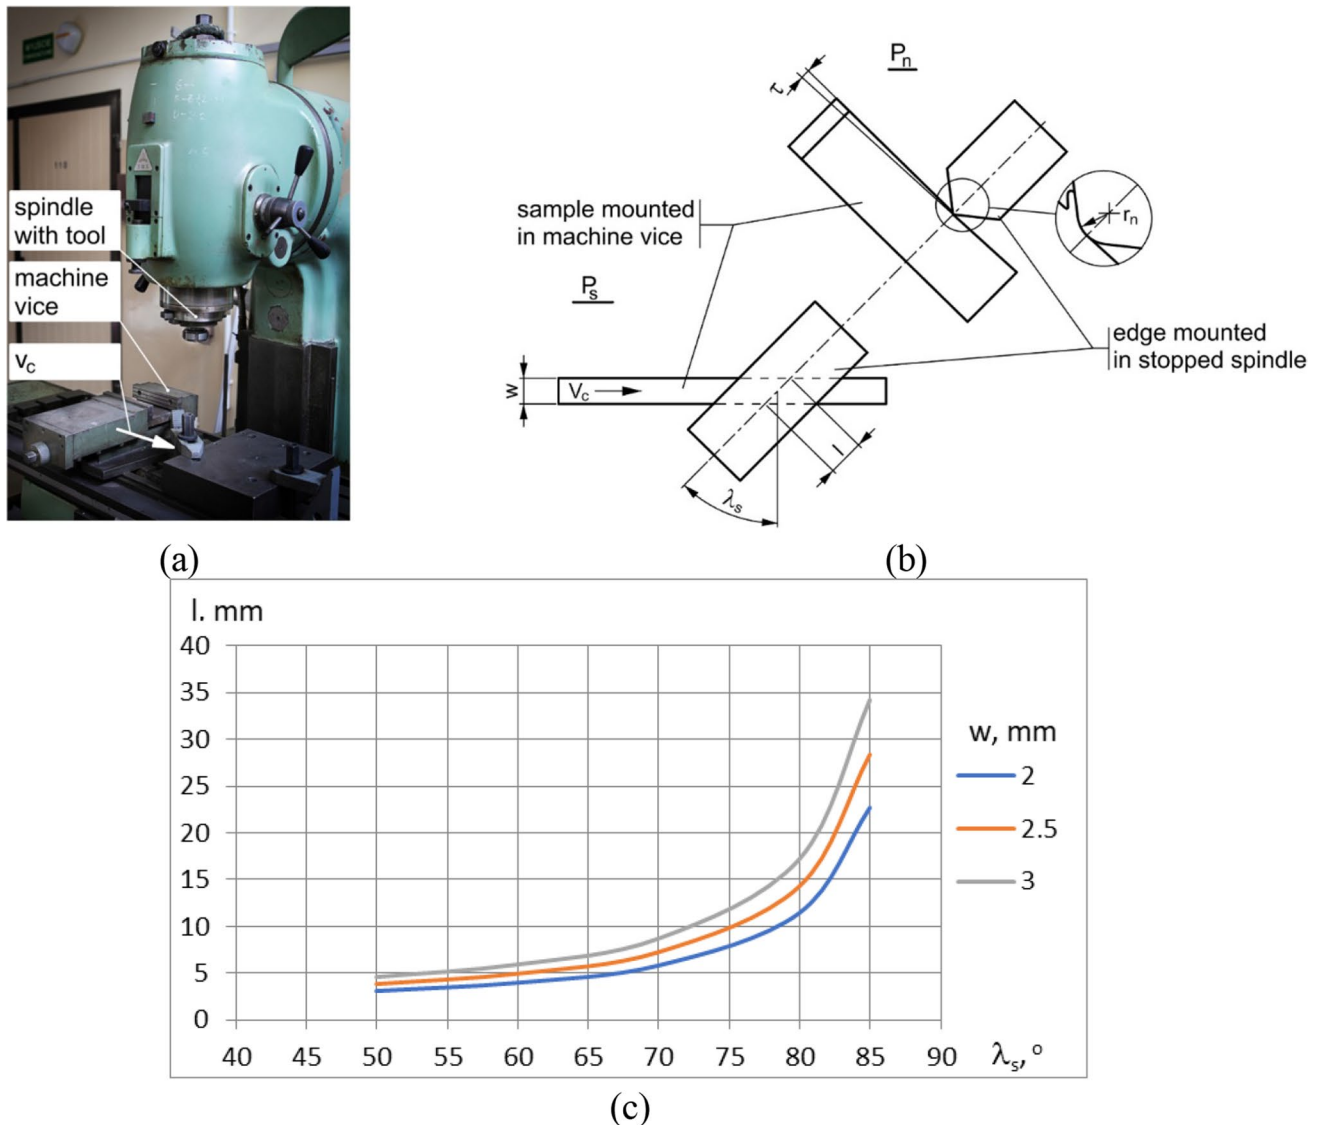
View of (a) the FB25VNC milling machine tool used in the tests, (b) kinematics of free oblique cutting experiments using mill machine tool and sample set in the direction of feed (v_c) and the edge
